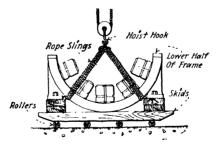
A method of fastening a lower section of a frame to a crane or hoist hook. Before the frame is raised, it should be unbolted from the skids.
